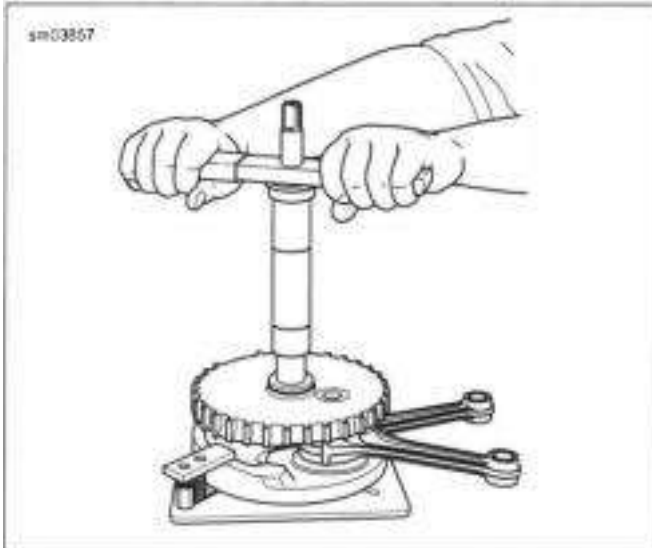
Press Inner Race onto Sprocket Shaft: Operation
